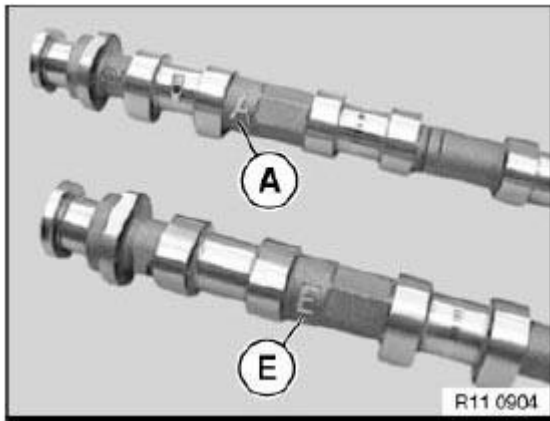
Markings Of Inlet And Exhaust Camshafts
